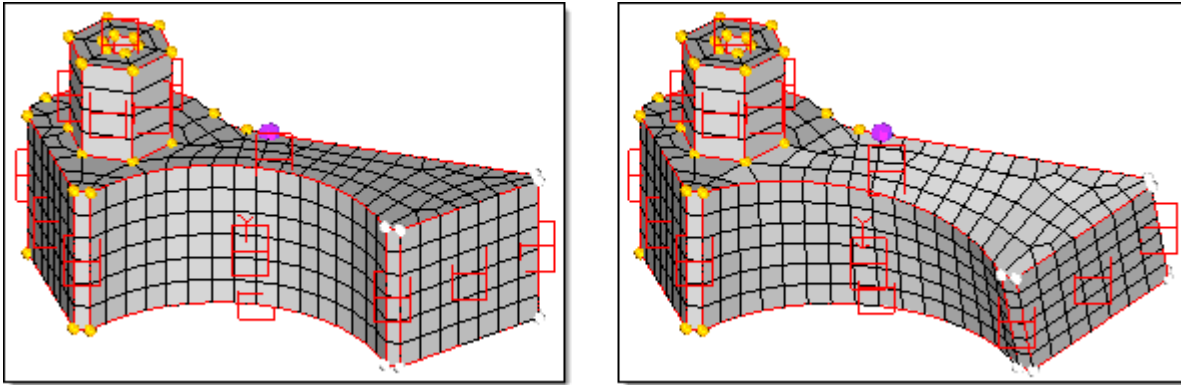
Morph by Rotating Handles at Right End of Block - Constant
